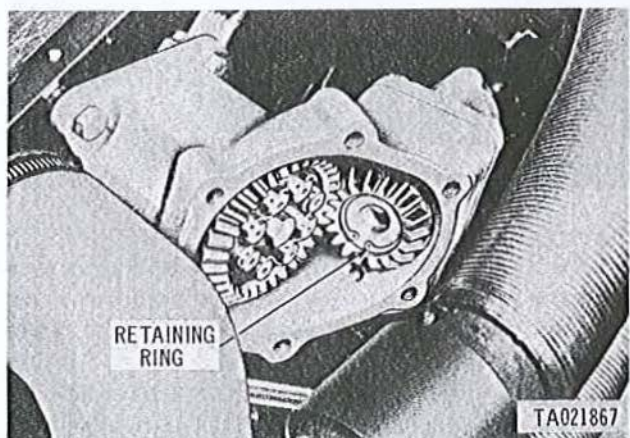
Removing or installing camshaft drive gearshaft plug retaining ring.
